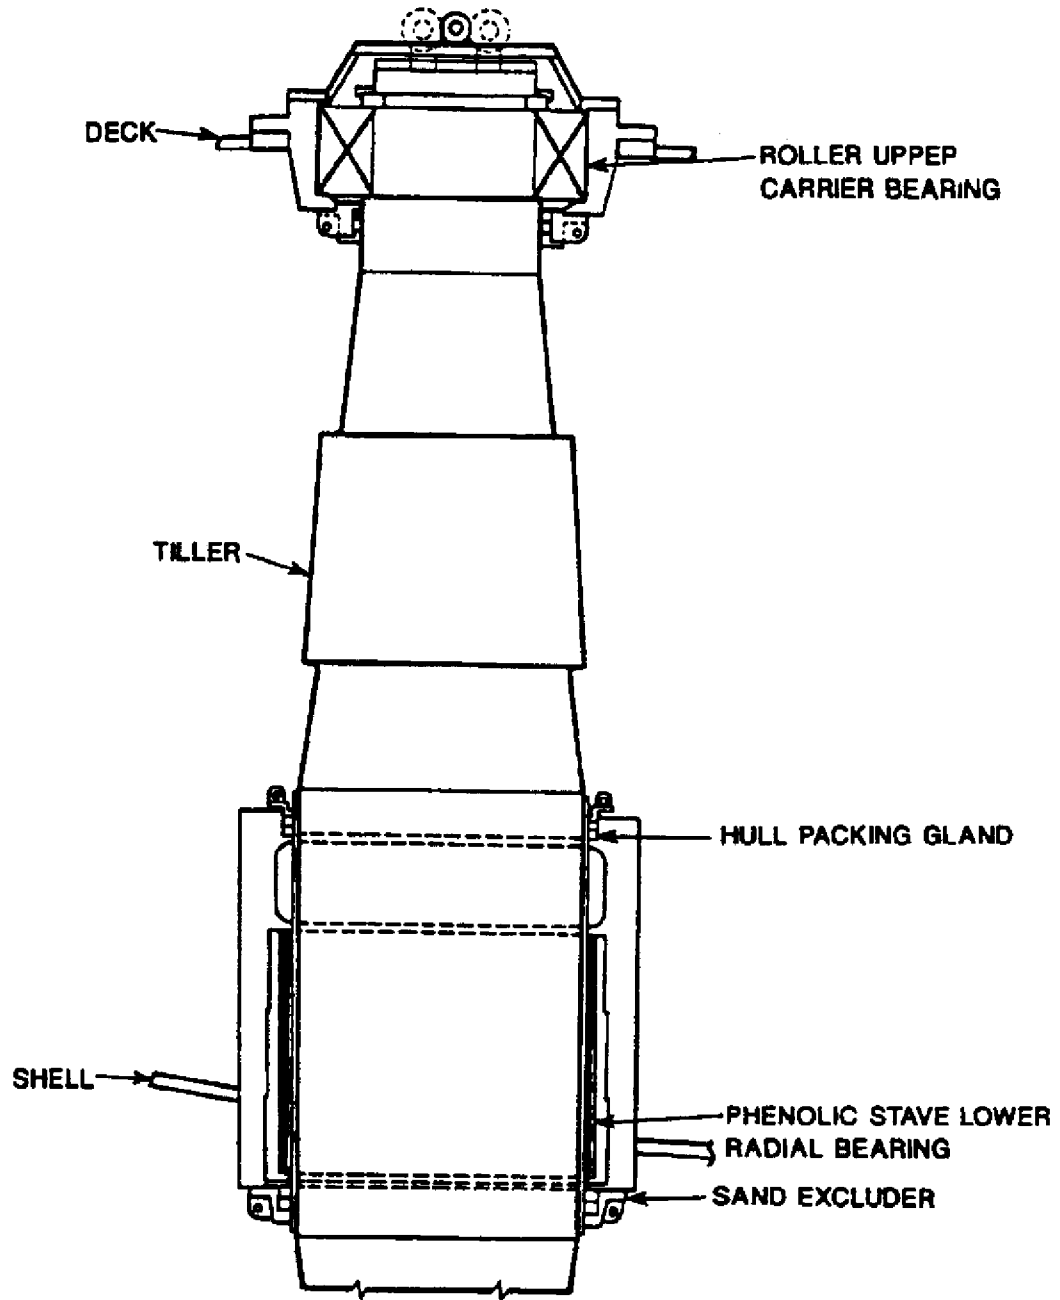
Hybrid Arrangement of Rudder Stock Bearings
